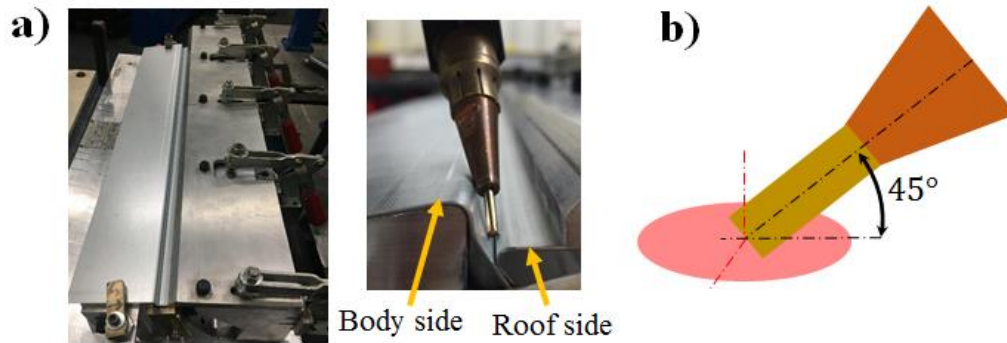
(a) Top and side view of fully clamped coupons in the welding fixture, (b) 3D laser beam and filler wire relationship.
